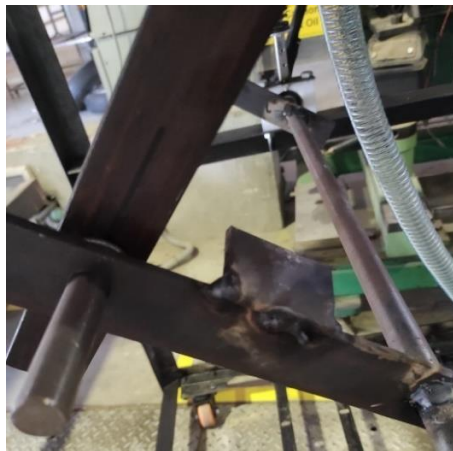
Welded MS plate with the links acts as the stopper.
